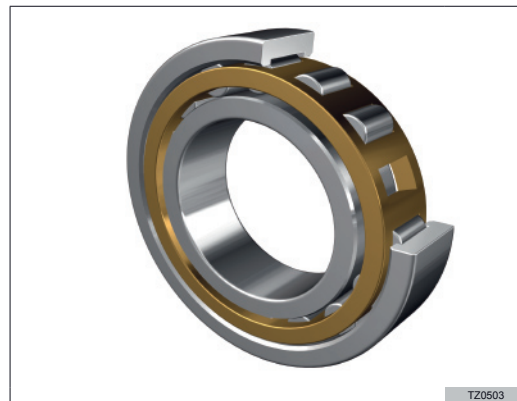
Single-row cylindrical roller bearing, with an open-end inner ring
